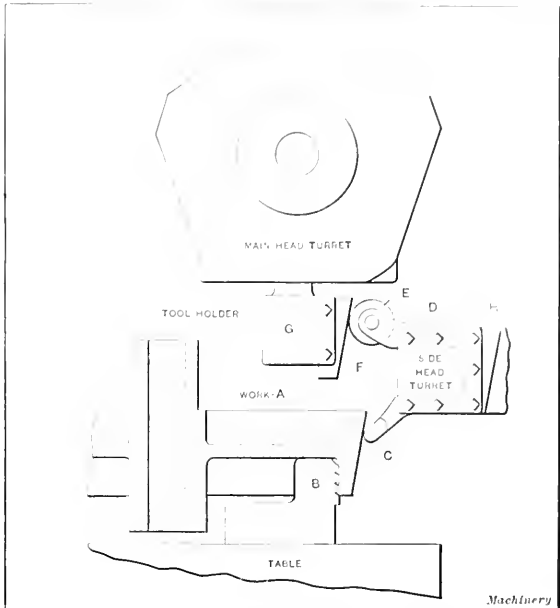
Makeshift Taper Arrangement for Emergency Vertical Turret Lathe Work
